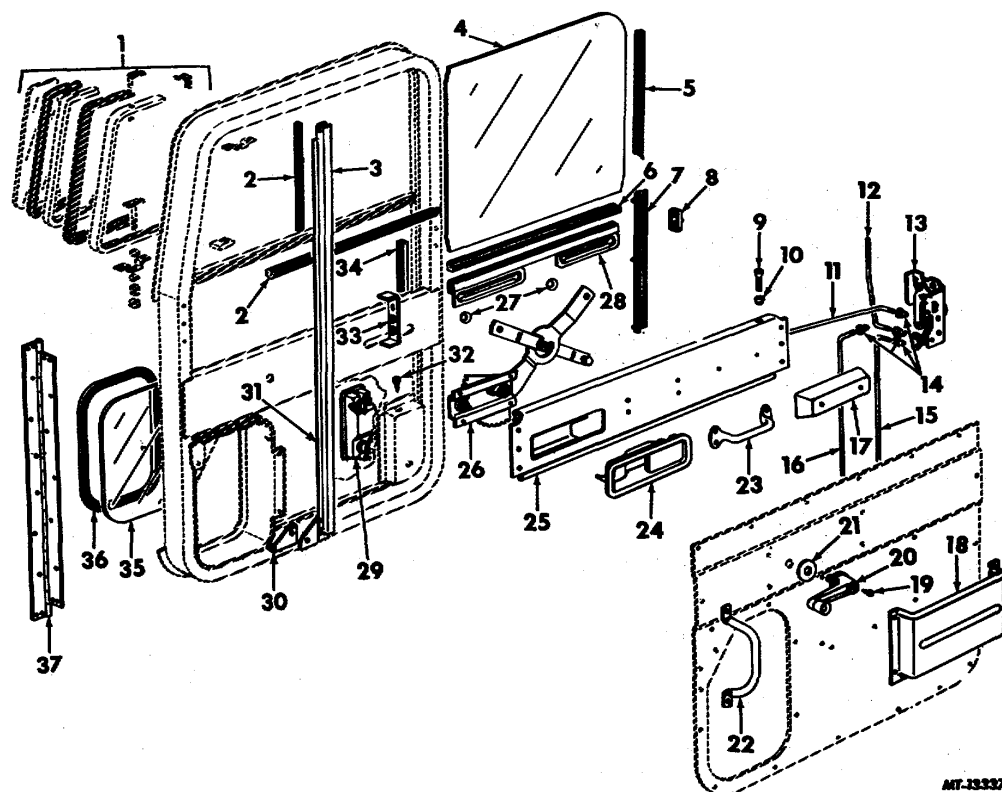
Cab Door Window and Vent Assembly (Exploded View)
